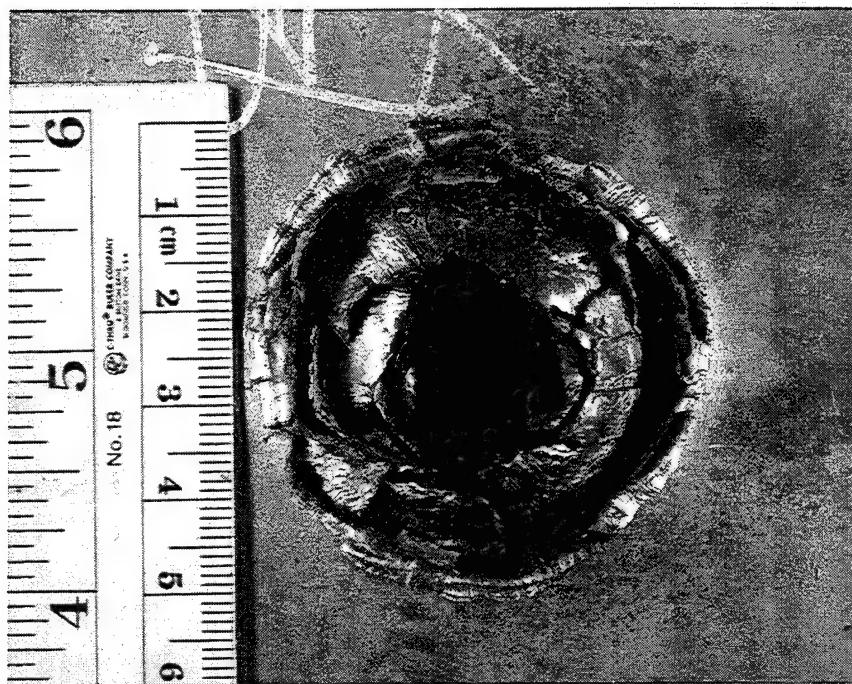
Photograph of typical exit spall in STA Ti-6Al-4V.
